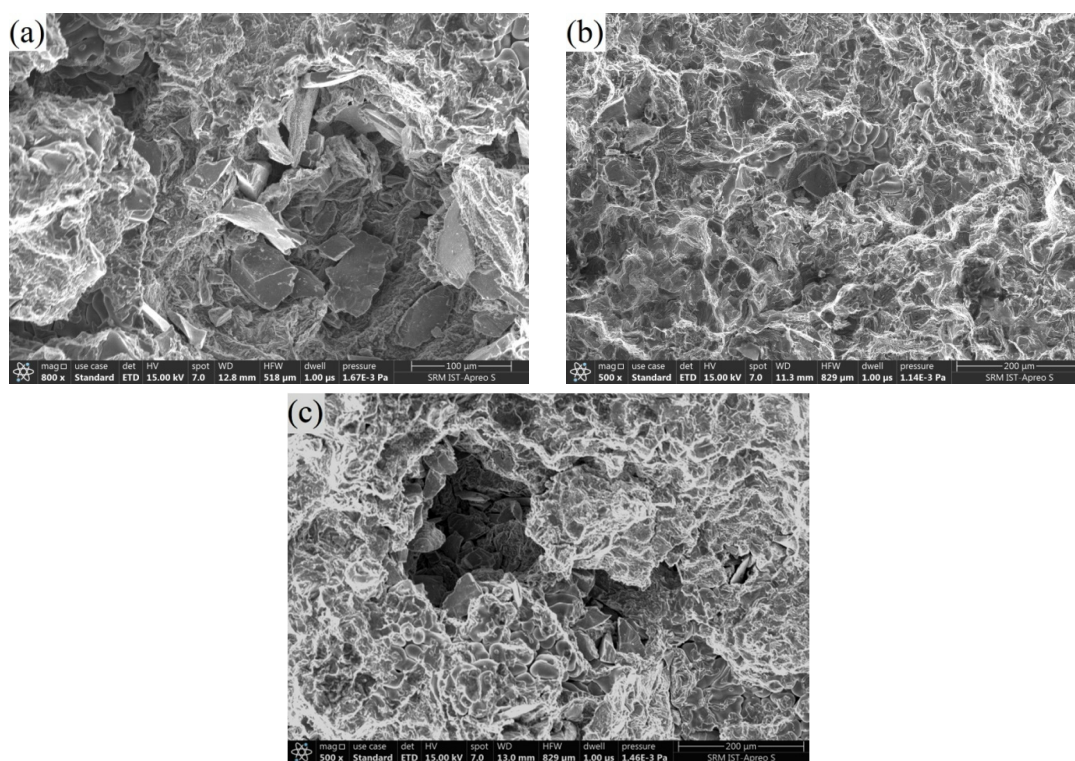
Fractography images of tensile failure samples of the composites prepared at pouring temperatures a) 630°C b) 670°C and c) 710°C
